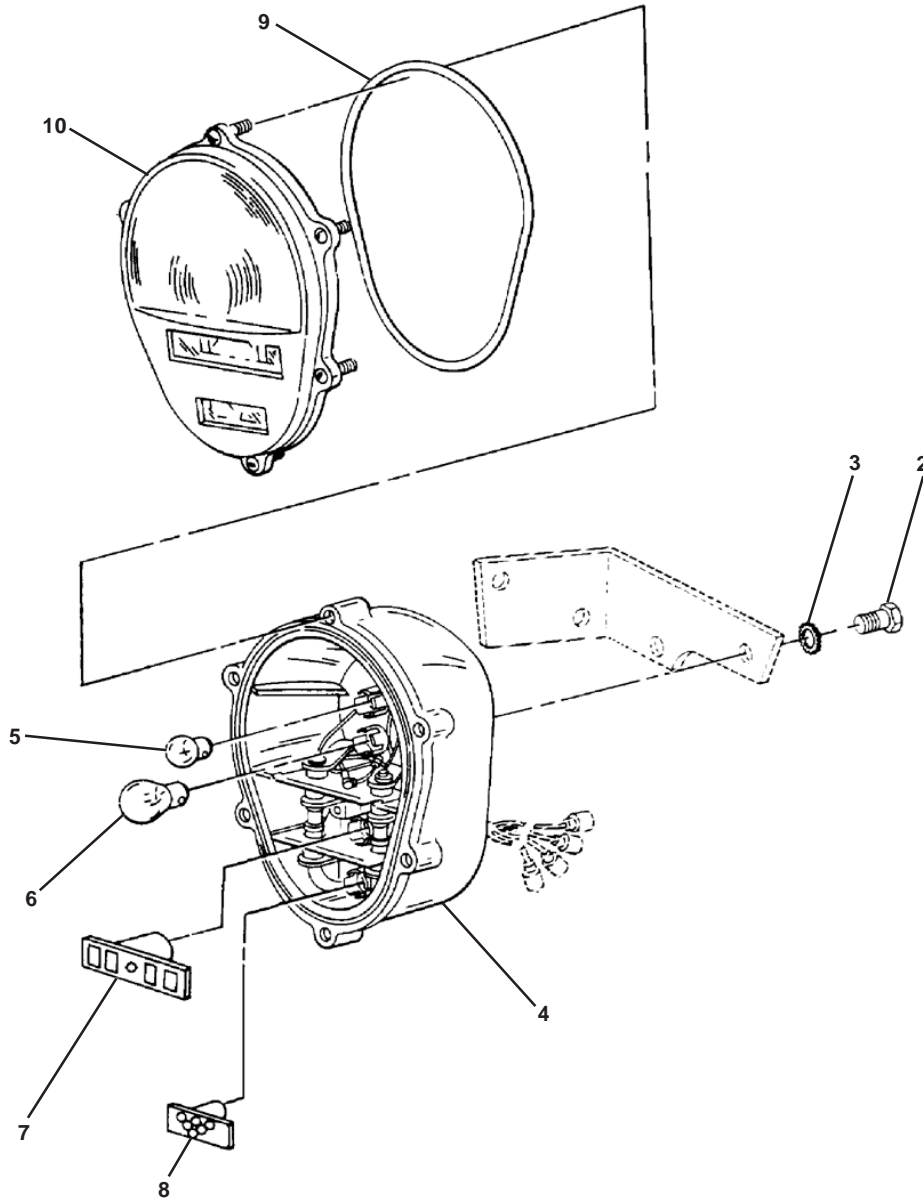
REAR COMPOSITE MARKER LIGHT ASSEMBLY.
